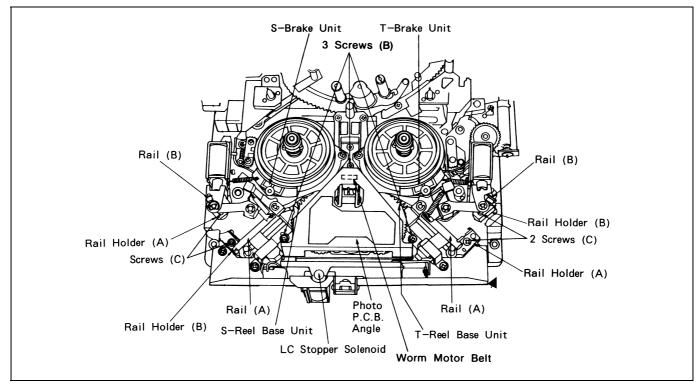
Removal of the S-Reel Base Unit and T-Reel Base Unit (Small Cassette Position)
